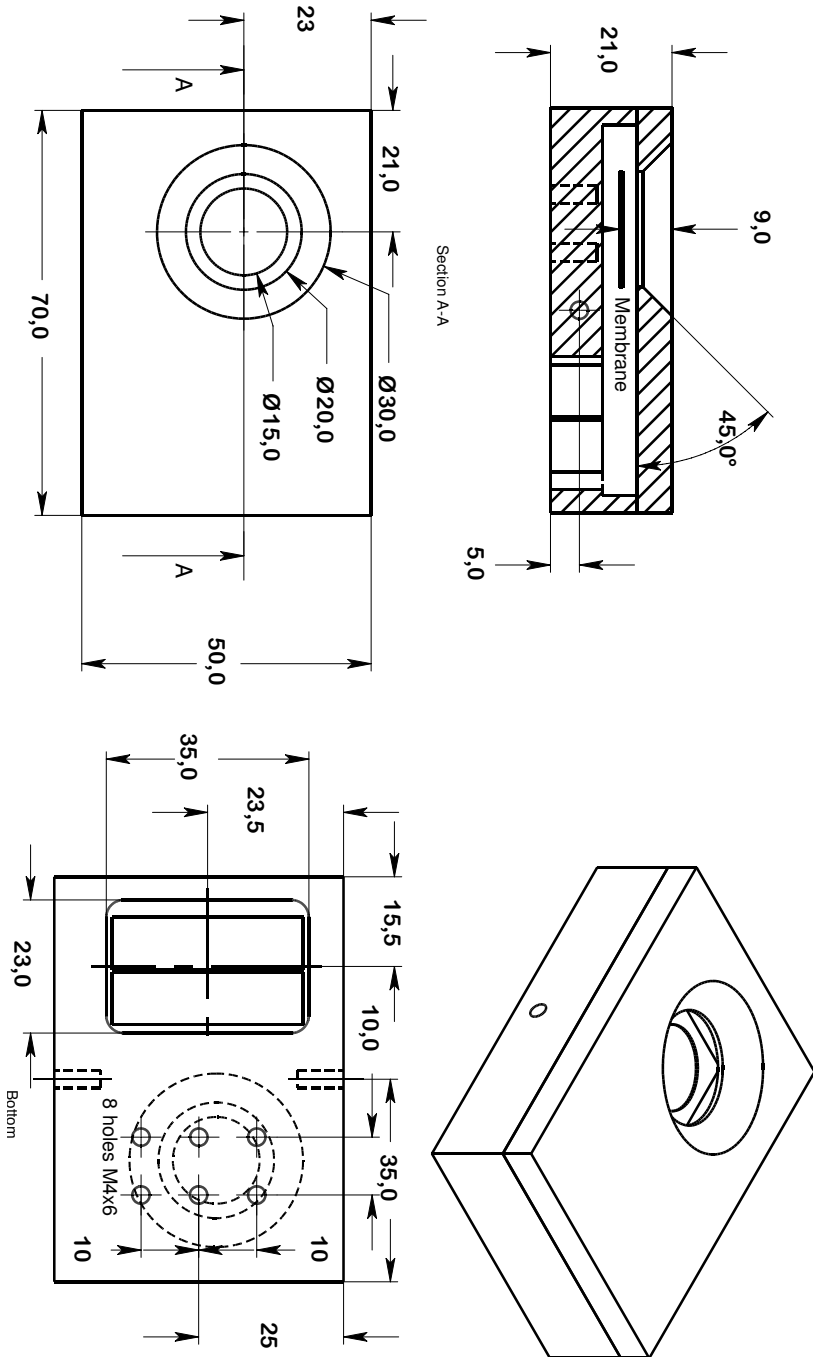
Technical drawing of the package and mounting holes of the 15mm 37-channel MMDM
